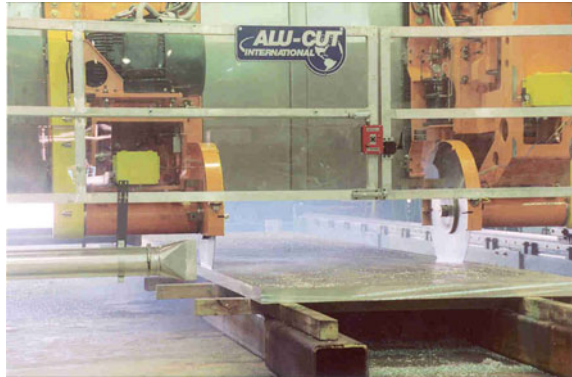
Edge milling of cast Alu plate on casting machine
